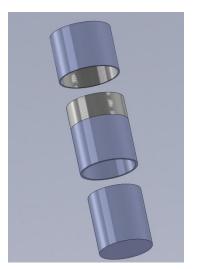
SolidWorks drawing of Rigid Shearing Sheath
